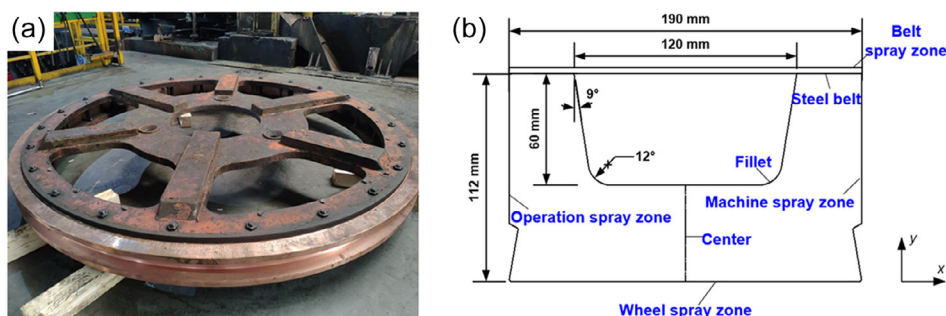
A typical casting wheel (a) and schematic of casting wheel cross-section (b)
